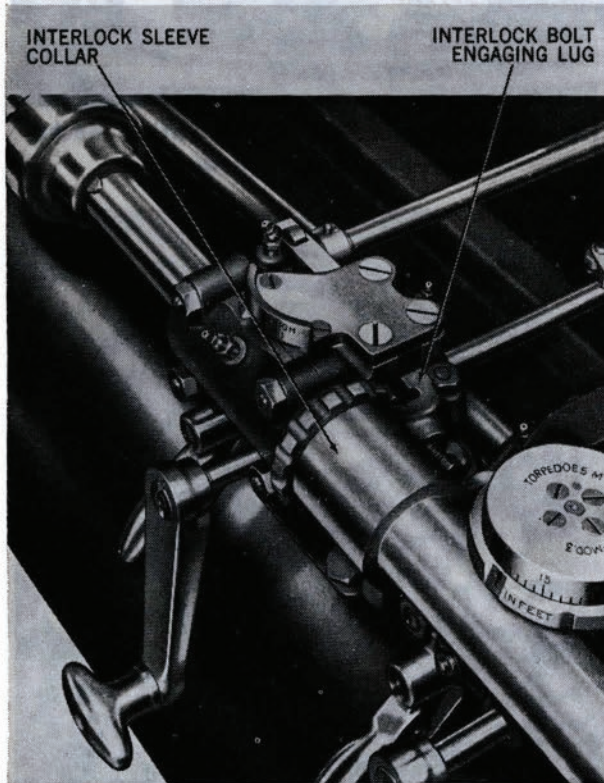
Simple Type Speed Setting Mechanism Installed—Spindle OUT.
